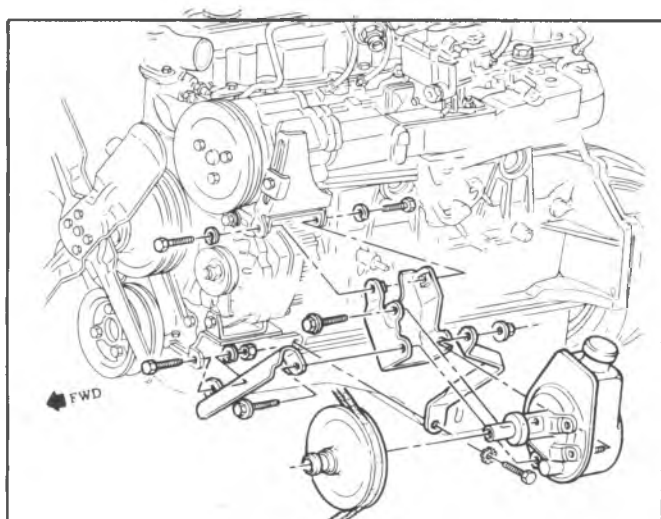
B3-23--P/S Pump Mounting; P200, P300 (42)
